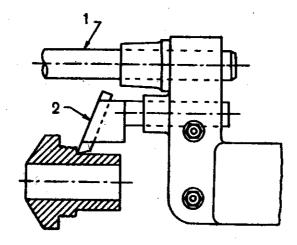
Combination tool holder 1. Pilot bar, 2. Turning tool,
